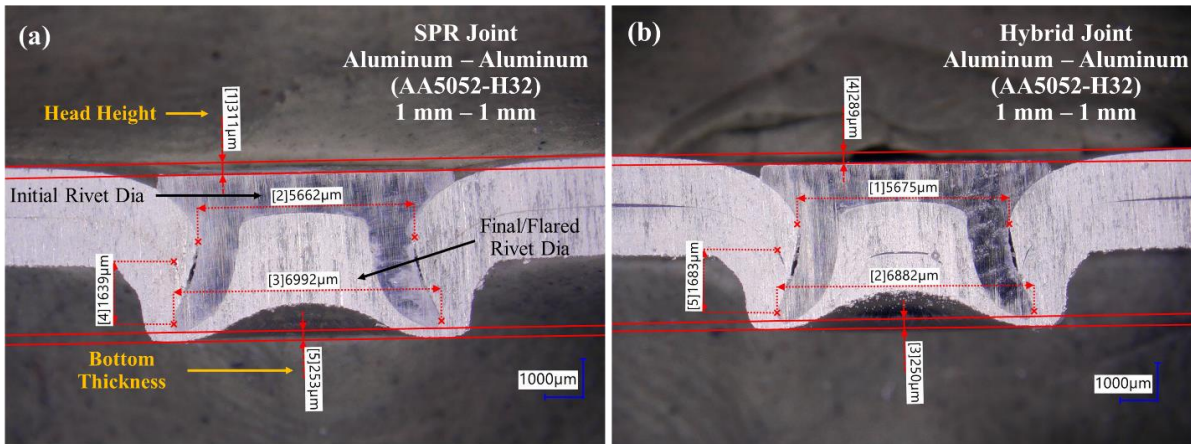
Cross-sectional imaging of SPR (a) and hybrid joints (b) made with 1 mm-thick aluminum AA5052-H32 alloy, showing the measured physical attributes.
